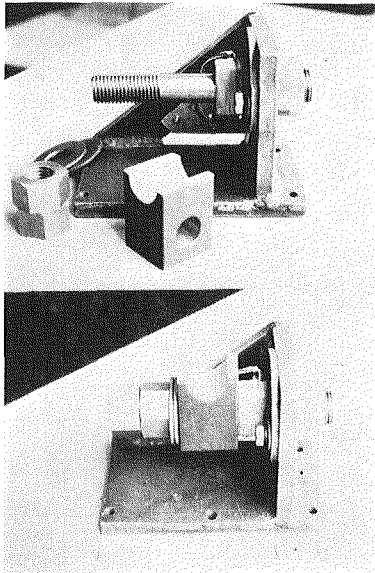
Special jig for loading and top-pin dynamometer assembly
